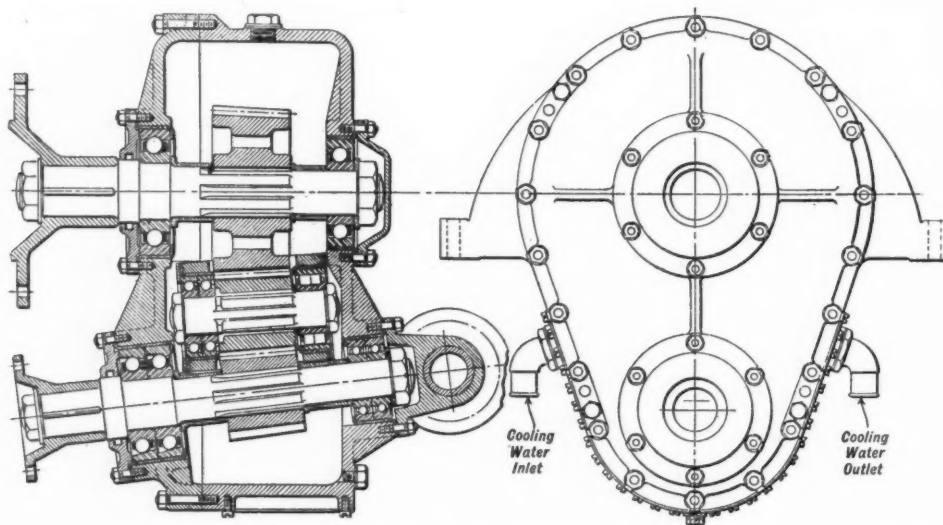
1400-HP VOSPER RETURN-DRIVE GEAR BOX
